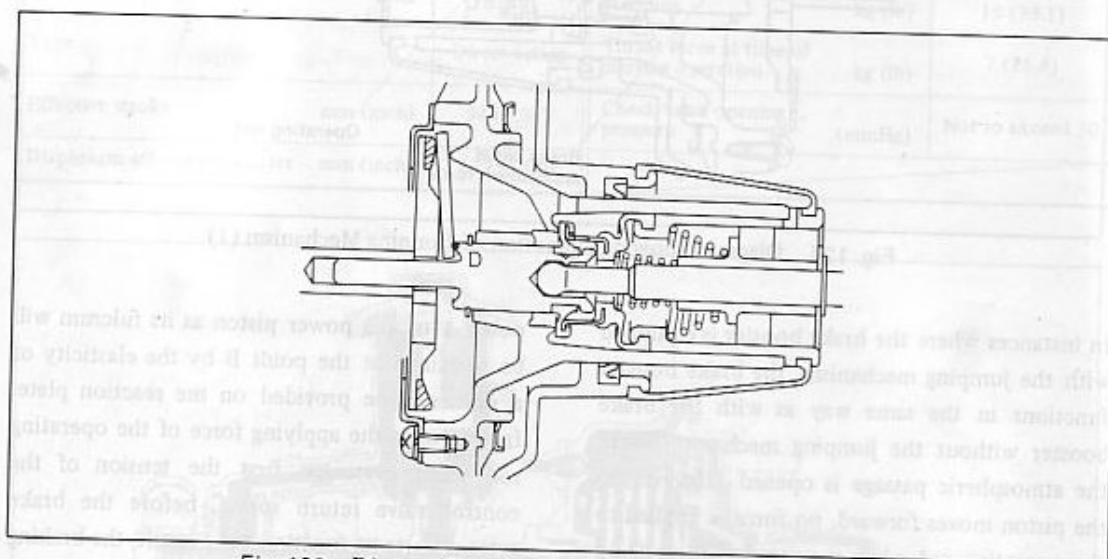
Diagram Showing Operating of Jumping Mechanism (3)
